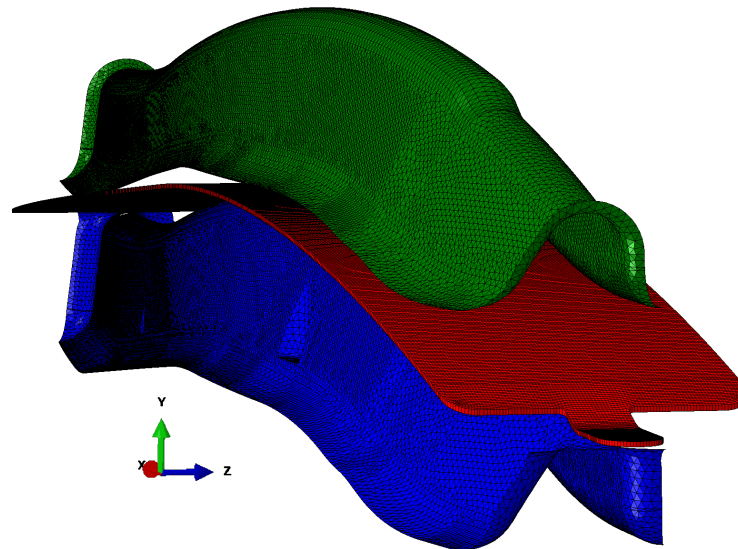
FEM model of the forming process—deformable blank (red)—upper rigid tool (green)—lower rigid tool (blue).
